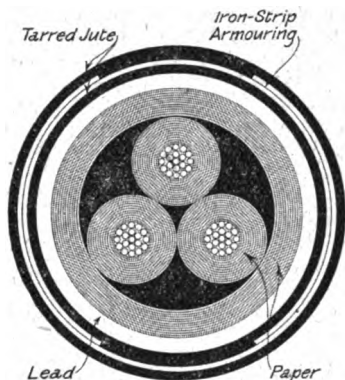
SECTION OF 30,000-VOLT ( $3 \times 0.0775$  sq. in.) CABLE. HALF SIZE
